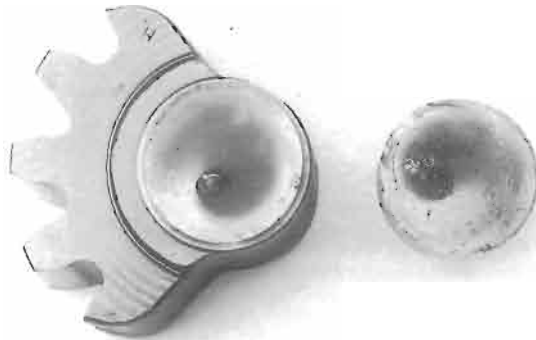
Photograph of the matching fracture surfaces.
